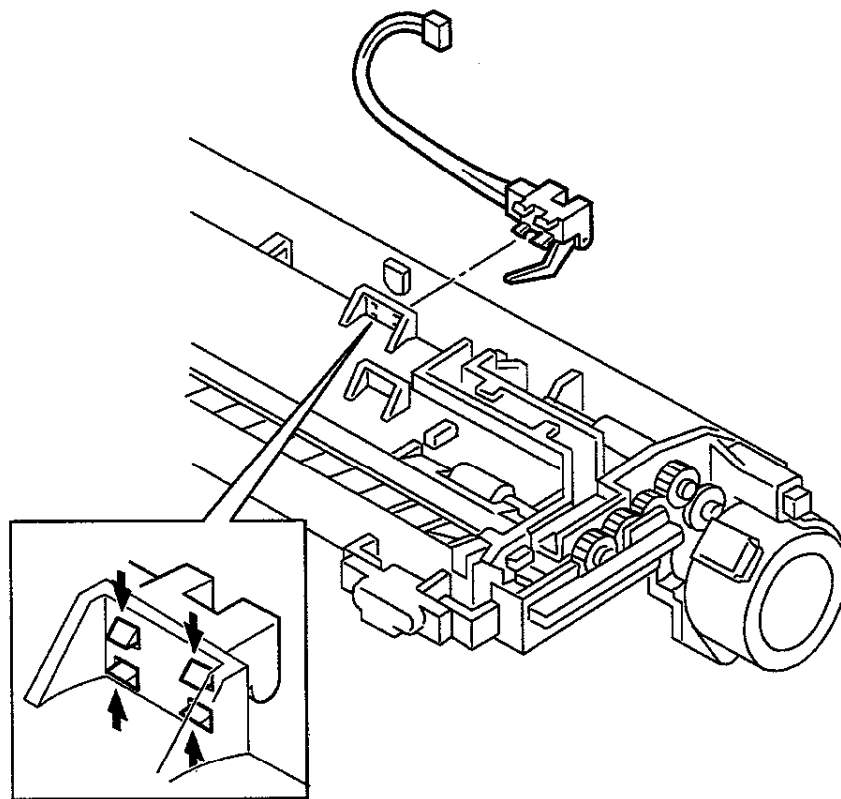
Removing the Duplex Sensor Assembly
